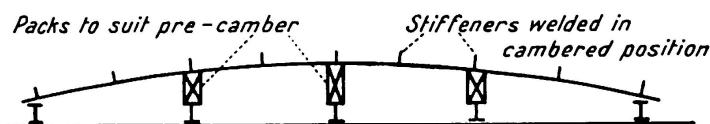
Cambering Web to Counteract Stiffener Distortion.
